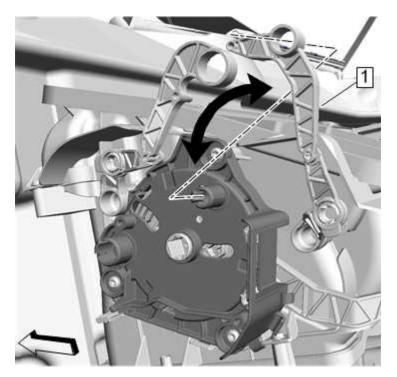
Vent Valve Lever Courtesy of GENERAL MOTORS COMPANY
